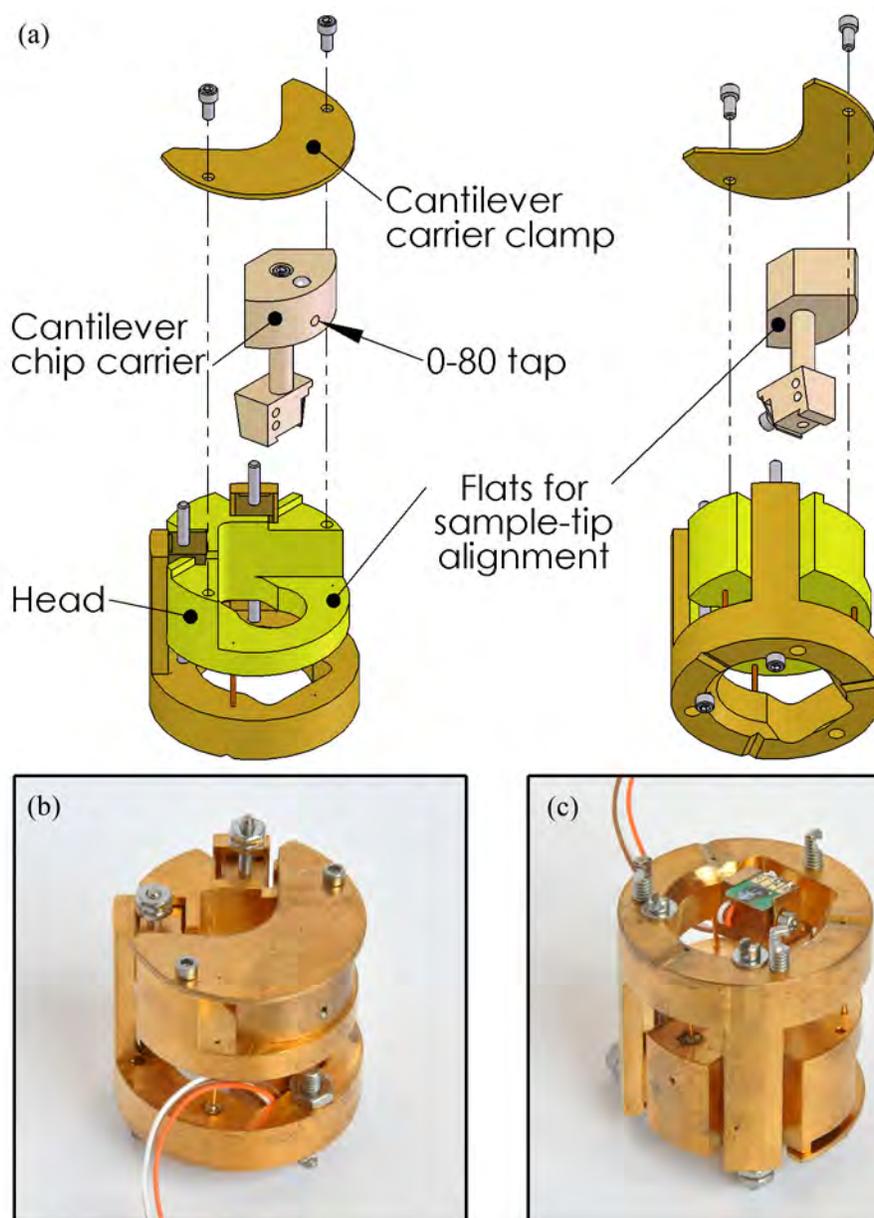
(a) Isometric projections of the exploded microscope head and cantilever mounting assembly. Flat surfaces on the upper head and the cantilever mount slider allow for room temperature coarse positioning over an area of approximately 3 mm by 3 mm. An 0-80 screw can be inserted into a tapped hole in the back of the cantilever mount slider and allows for precise positioning of the cantilever with respect to a sample. A brass clamp holds the cantilever mount in place when in the desired position. (b) and (c) Photos of the assembled head and cantilever mount, with cantilever chip attached. Three hooks on the bottom of the head allow for the attachment of the head to the microscope cage with springs.
